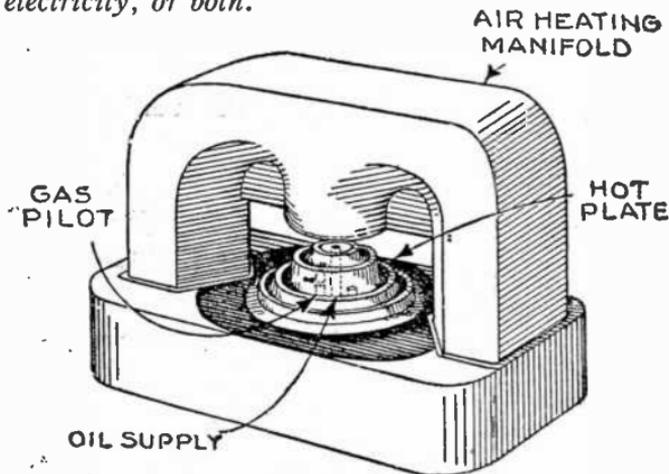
,713.—Casting of a vaporizing burner with which is incorporated the continuous burning gas pilot and plate heating flame.
